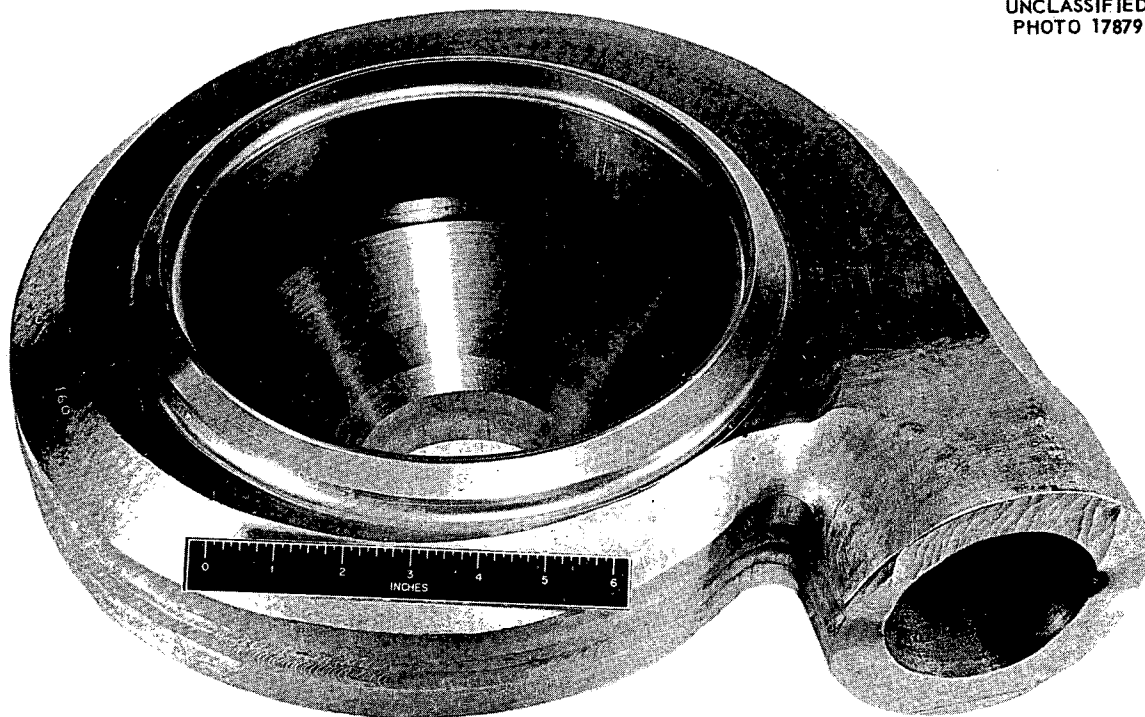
Primary Pump Volute No. 2 After Inert-Arc Welding and Annealing.
